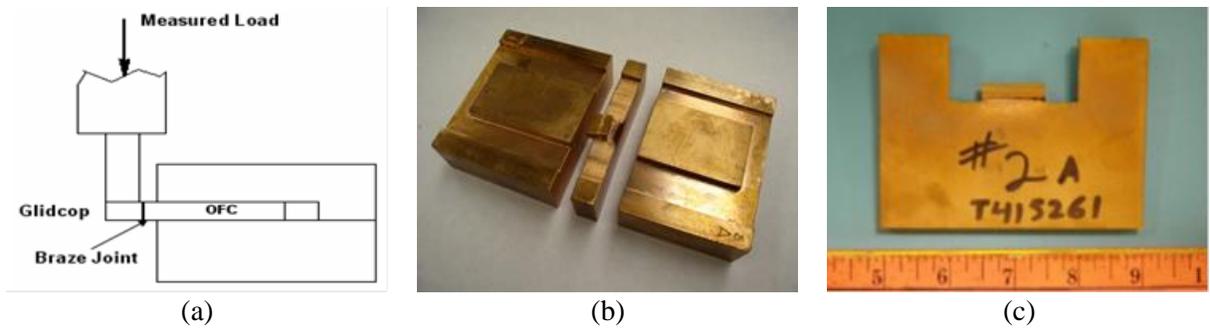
Shear strength tests on brazed joints between Glidcop to OFC, (a) shear test set up, (b), hydrogen-brazed sample with large deformation [1], and (c) brittle failure in a vacuum-brazed sample.
